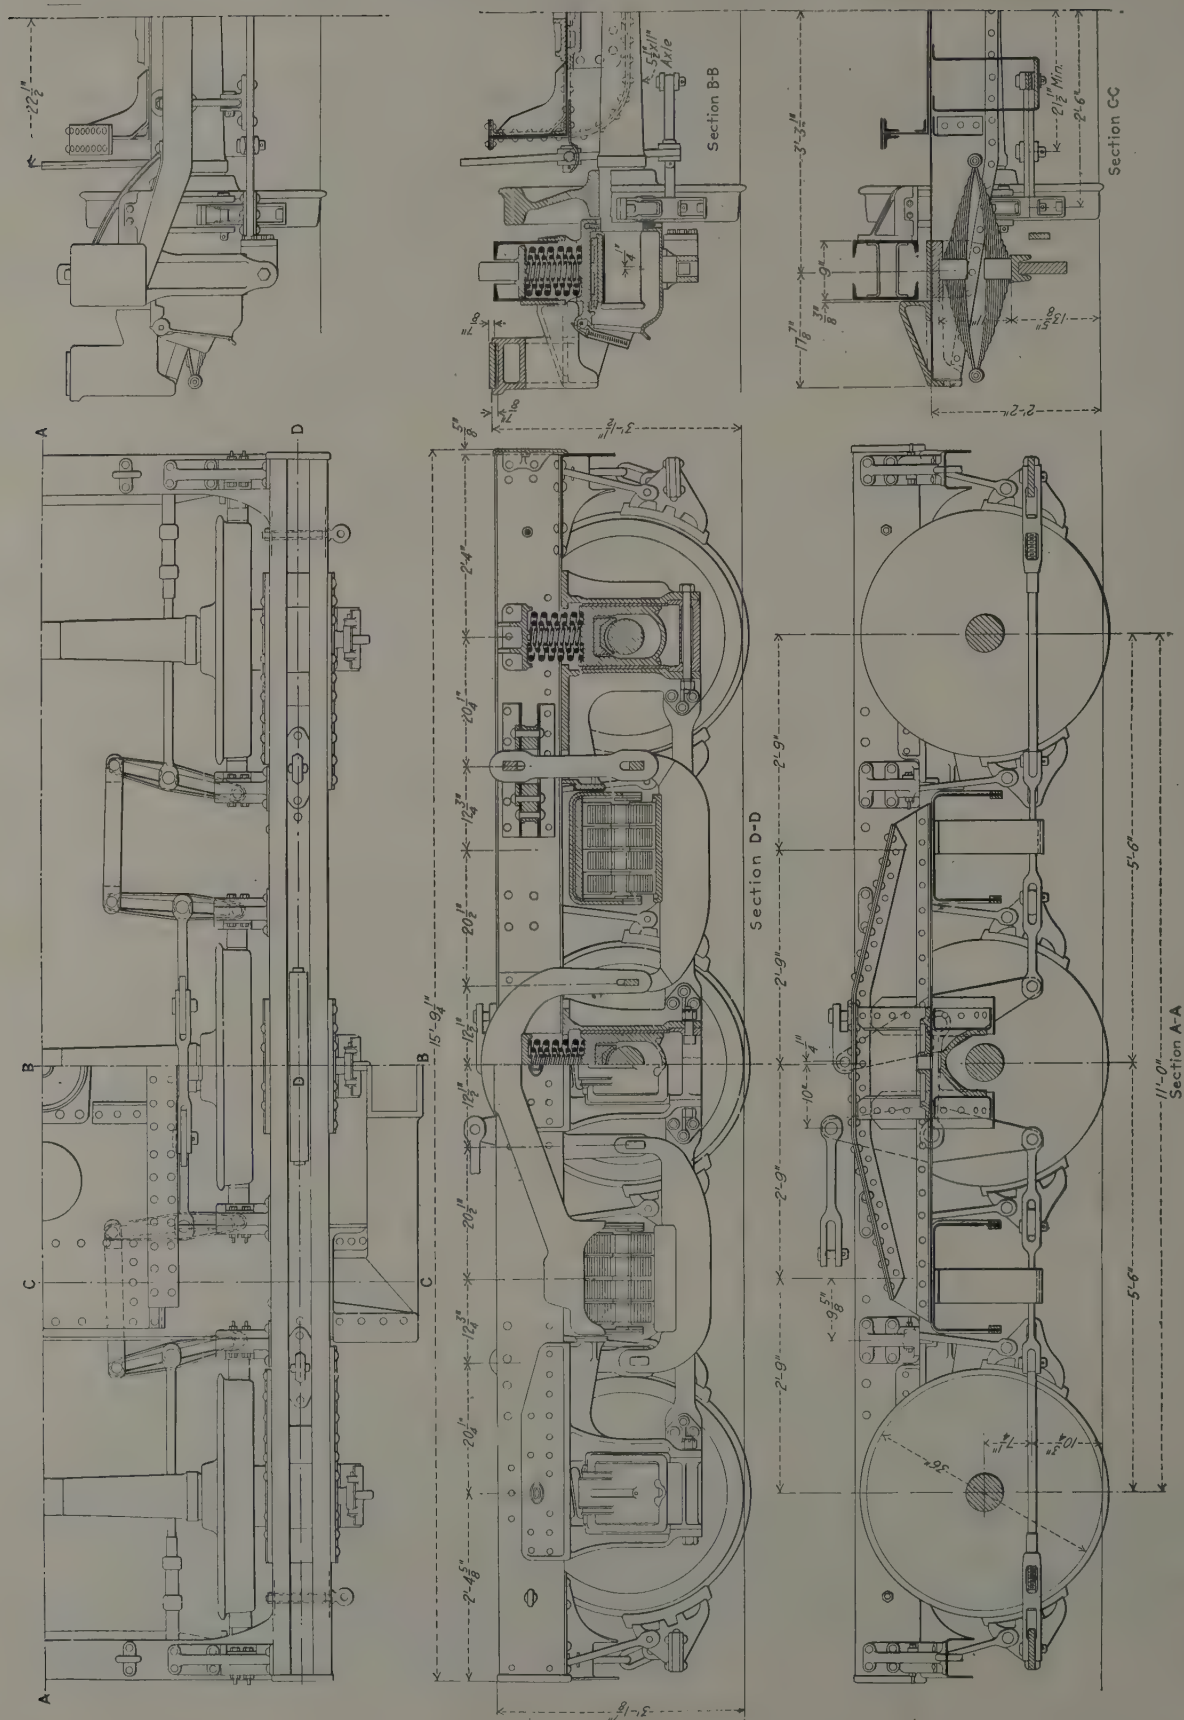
Six-Wheel Class C Passenger Car Truck. Pennsylvania Railroad
